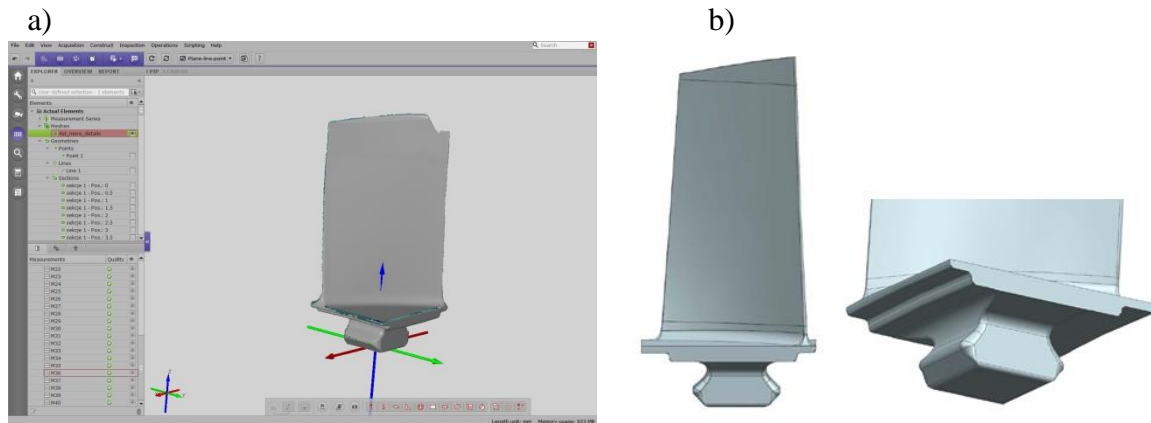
a) Geometry of the blade after 3D scanning, b) CAD model of the blade and dovetail joint
